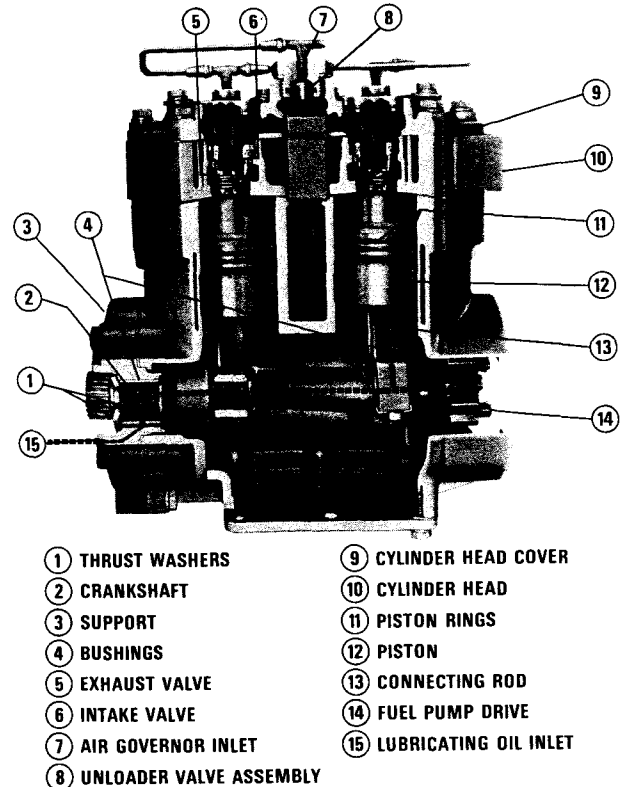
, (AWC-11). Cummins air compressor (two cylinder)
